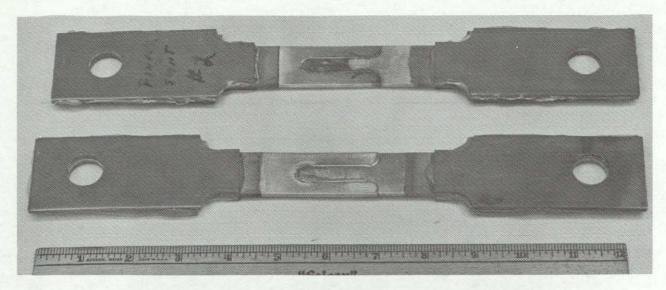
BRAZE JOINT SPECIMENS BEFORE TEST
